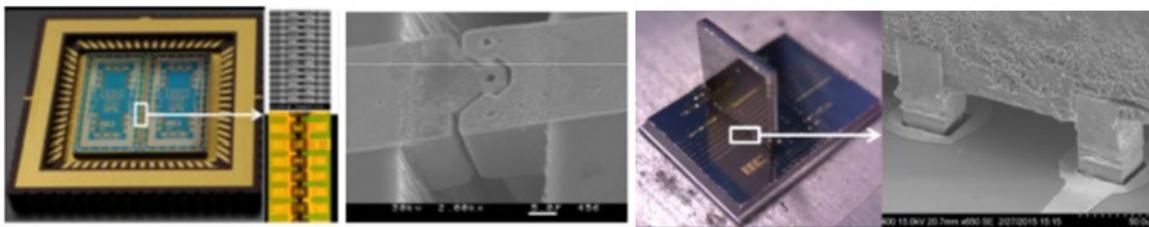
Chip-to-chip and board-to-board interconnect examples with quilt packaging.
